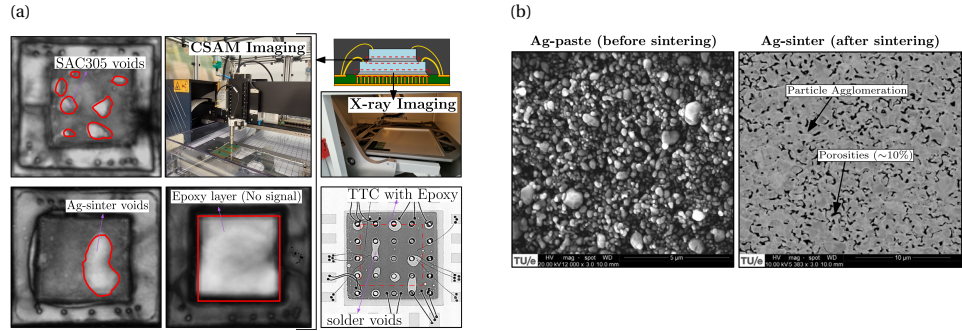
(a) Inspection of samples using CSAM imaging and X-rays. Voids on the Ag-sintered layer and SAC305 soldered layer were observed. No signal passes through epoxy material due to higher acoustic impedance. X-ray examination indicates voids on the PCB solder layer (below the diode). (b) SEM images of the Ag-paste before sintering (laterally dispensed in a flat plate) and after sintering (vertically cross-sectioned) are shown. Agglomeration of particles with 10% porosities was observed after sintering.
